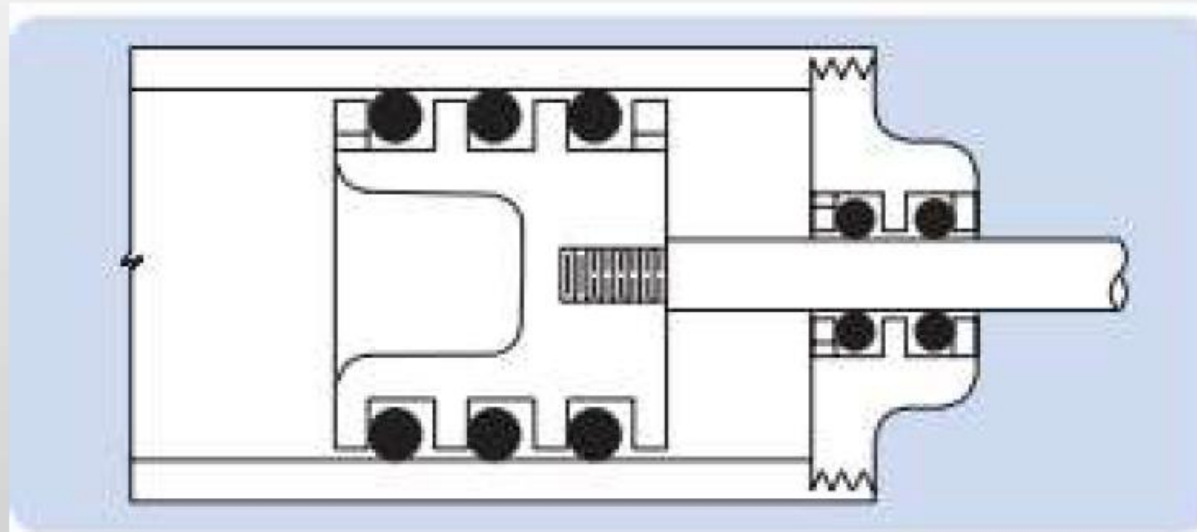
Use of Multiple O-Rings in a Floating O-Ring Design
